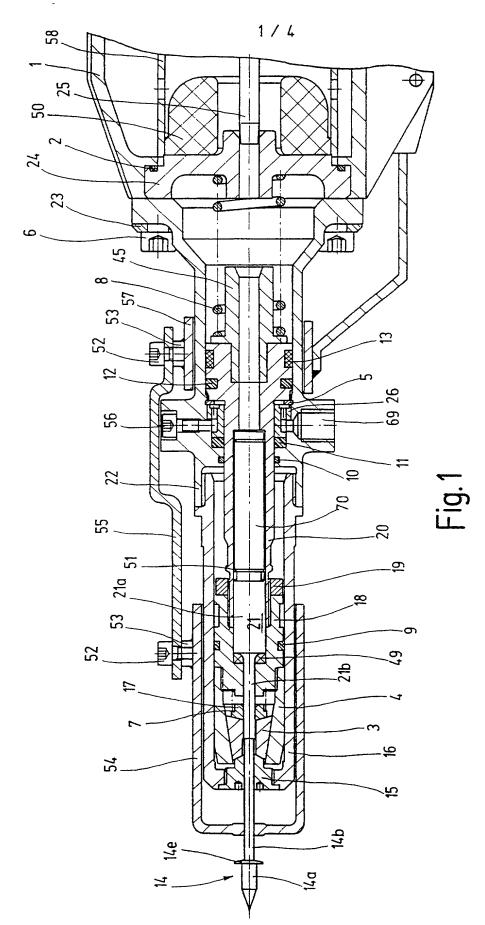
shows a section through the head part of the device according to the invention, which device is responsible for the firing and pulling of the rivet. The housing 1 of the device is represented at the right edge of the drawing, on which housing with use of a first packing O-ring 2 and a glass shield 24 the first cylinder 22 is screwed on by means of cylindrical screw 6 and supporting disks or washers 23. Likewise on the right edge of the drawing is represented the pneumatic cylinder 58 with the firing bolt 25 and the first buffer 50. Firing channel 70 extends in axial extension of firing bolt 25 and is /formed/ by the centering piece 45,
